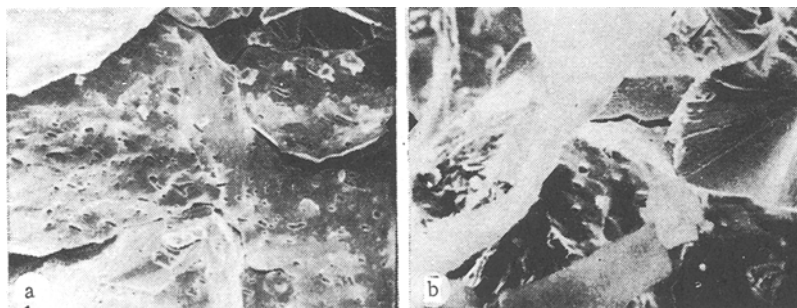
Fracture surfaces of recrystallized tungsten at temperatures of: a) 20, $\times 1300$; b) 2200°C, $\times 1350$.
